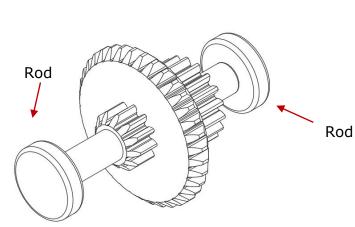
E Isometric View of an Internal Gearing with Rods equipped.
